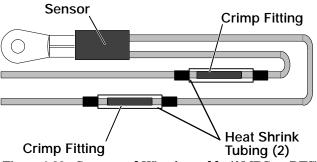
Sensor and Wire Assembly (AMBS or DTS)
